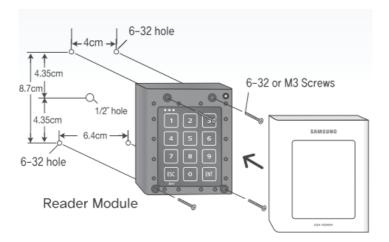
A drawing of mounting the SSA-R2000V sensor on the wall
